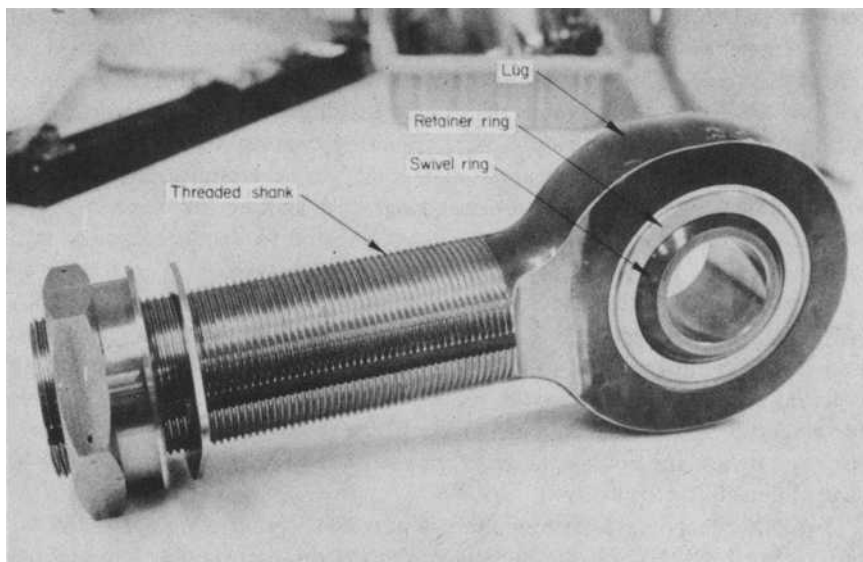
Finite-element model of rod end component—photograph of rod end.
